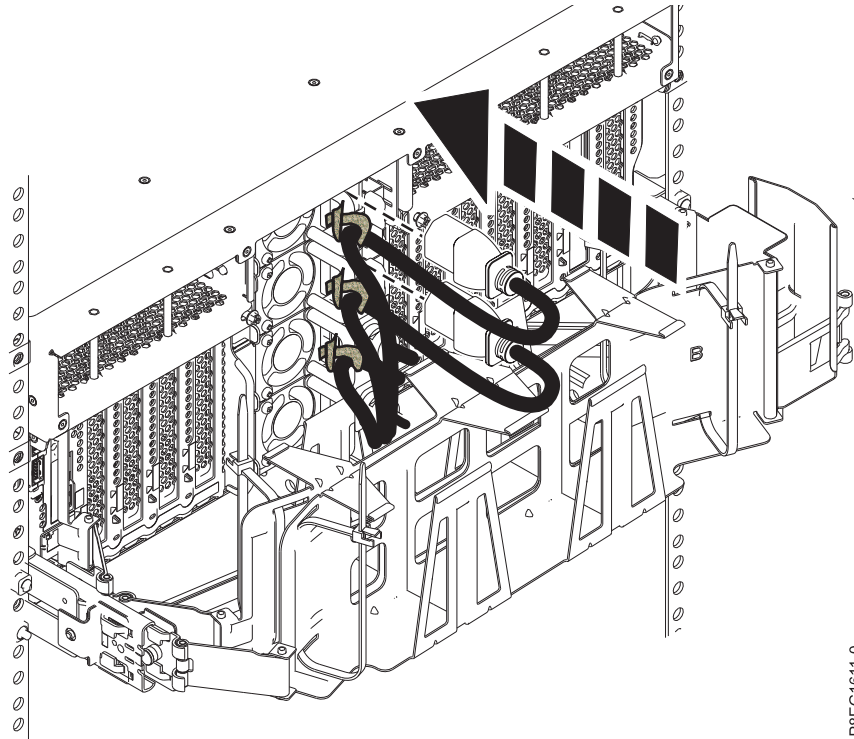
Removing the shipping bracket from the rear of the chassis
